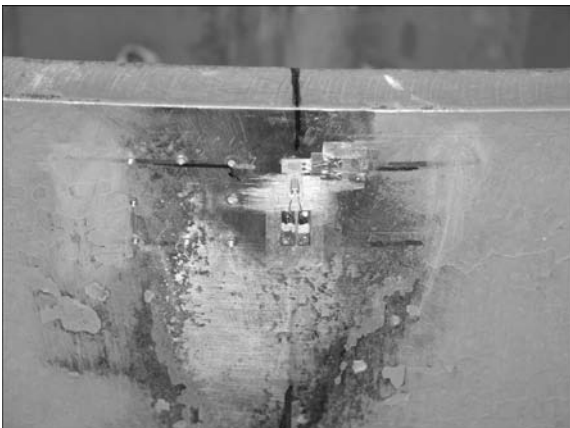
Measurement of strains in the explosion welding support (scale division value – 2 μm)
